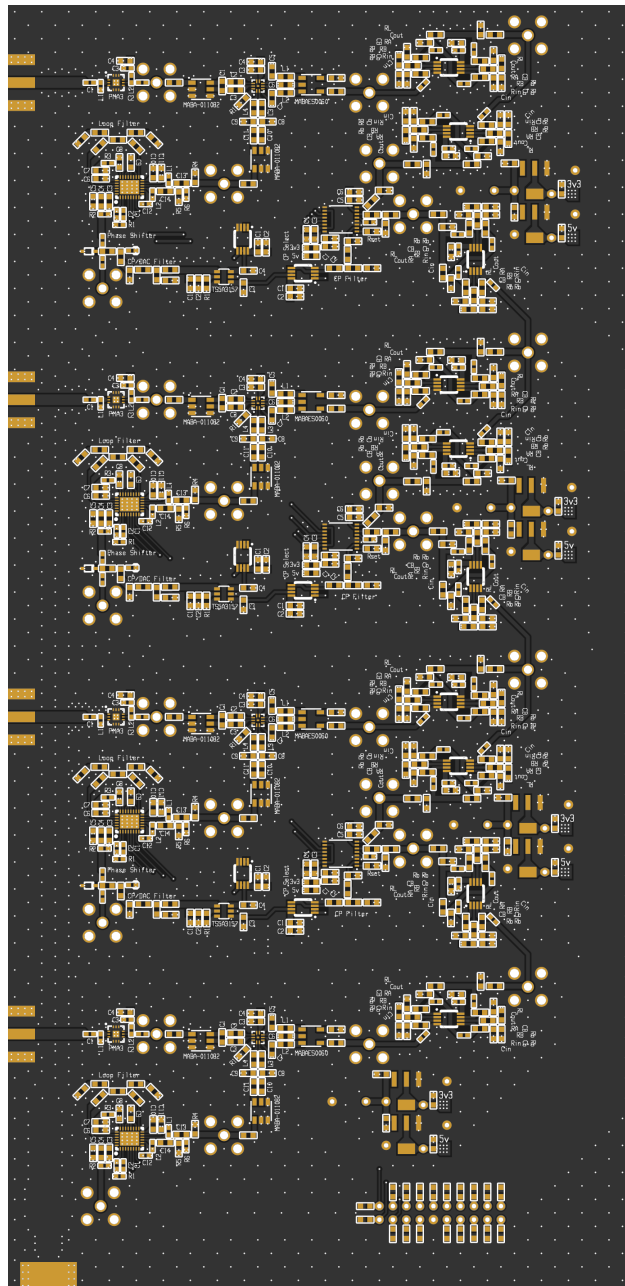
DLL-HPC received signal beamformer PCB front-side render
